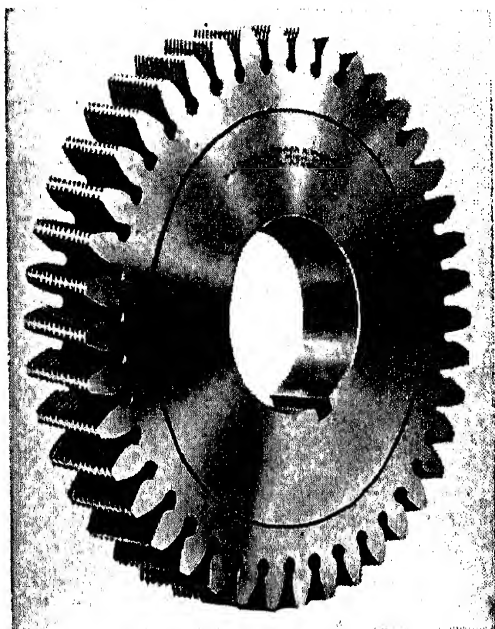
A rotary gear shaving tool. (Courtesy National Broach and Machine Co.)
